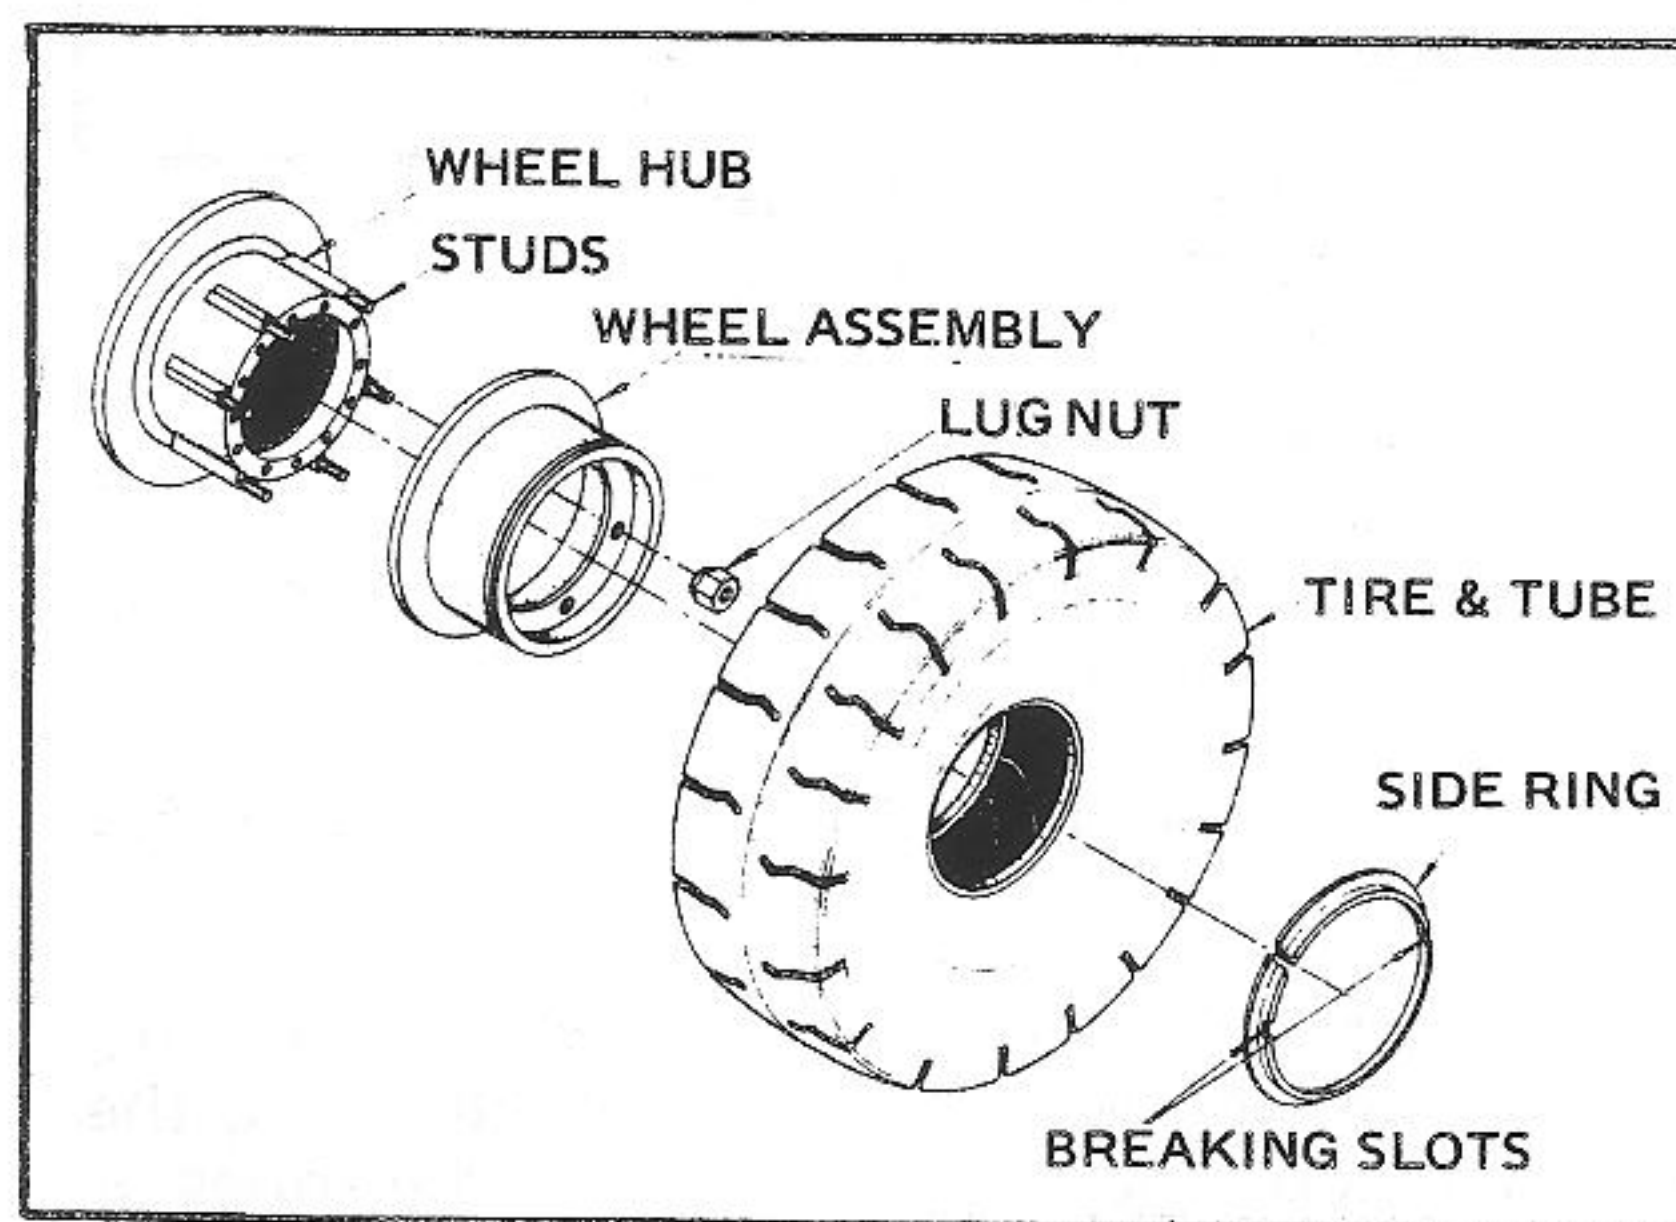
WHEEL AND TIRE INSTALLATION
